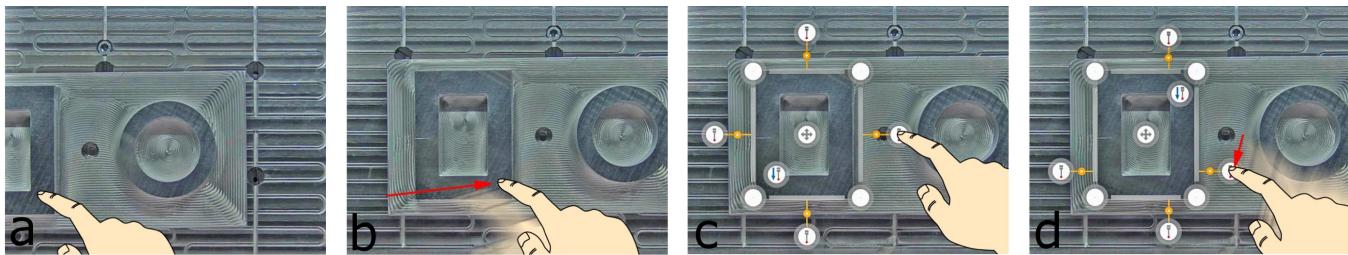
CaMea supports users in the process of initializing a workpiece in a CNC milling machine. We mounted a camera inside the machine and allow the user to move (a,b) the camera though touch gestures to align the camera with the workpiece. Once aligned, the user can select (c) and move (d) the touch points for the probing tip on screen.
